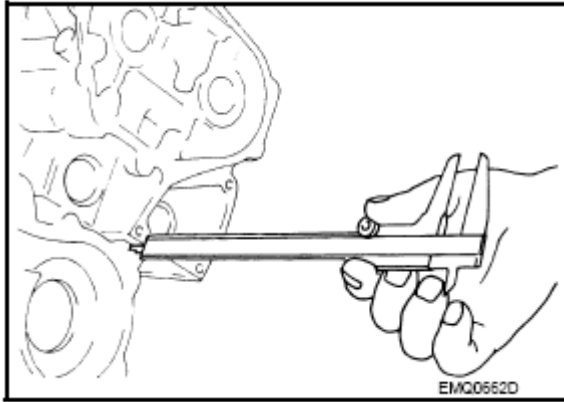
Measuring Distance Between Front End Faces Of Cylinder Block And Cylinder Head Using Tool
